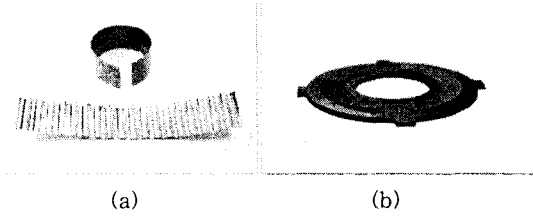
Air foil bearings: (a) air foil journal bearing (b) air foil thrust bearing
